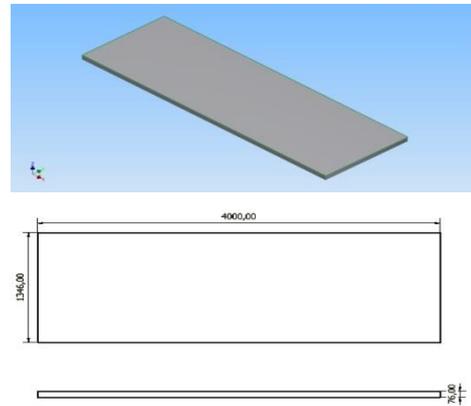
Channel Replacement Plate and Dimensions of Channel Replacement Part
